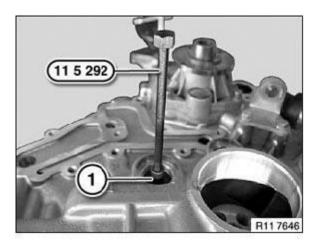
Screwing Special Tool (11 5 292) At Bearing Pin Courtesy of BMW OF NORTH AMERICA, INC.
